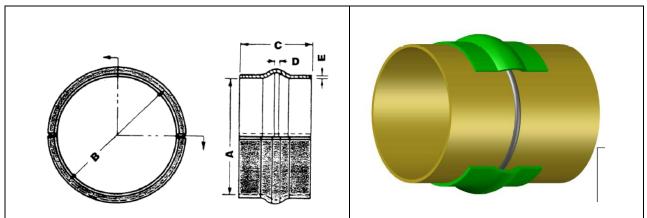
Full- Encircling pressure-containing Sleeve (Type B -Gerth weld)
